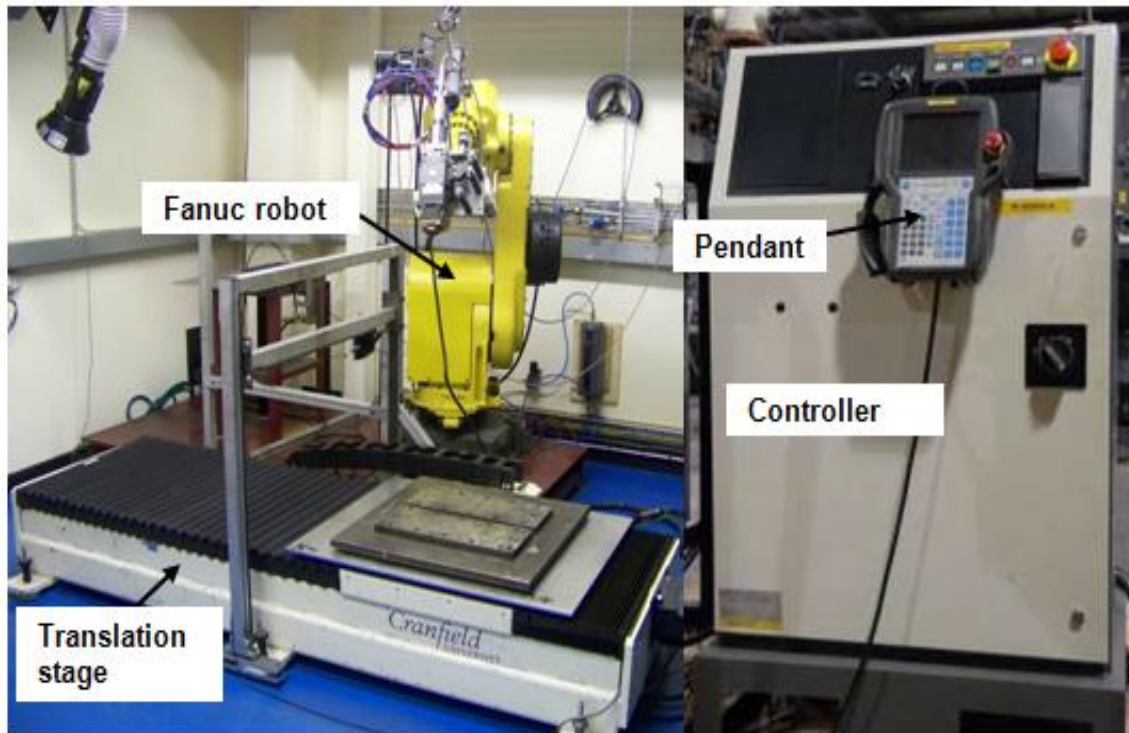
Photograph of the complete Fanuc welding robot system showing the robot, controller and pendant
